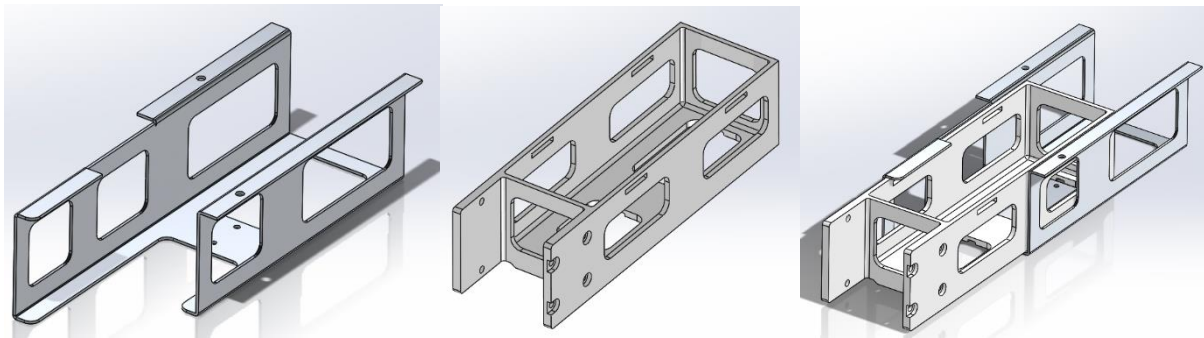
Left: mounting cage, middle: 3D printed battery housing and right: assembled
